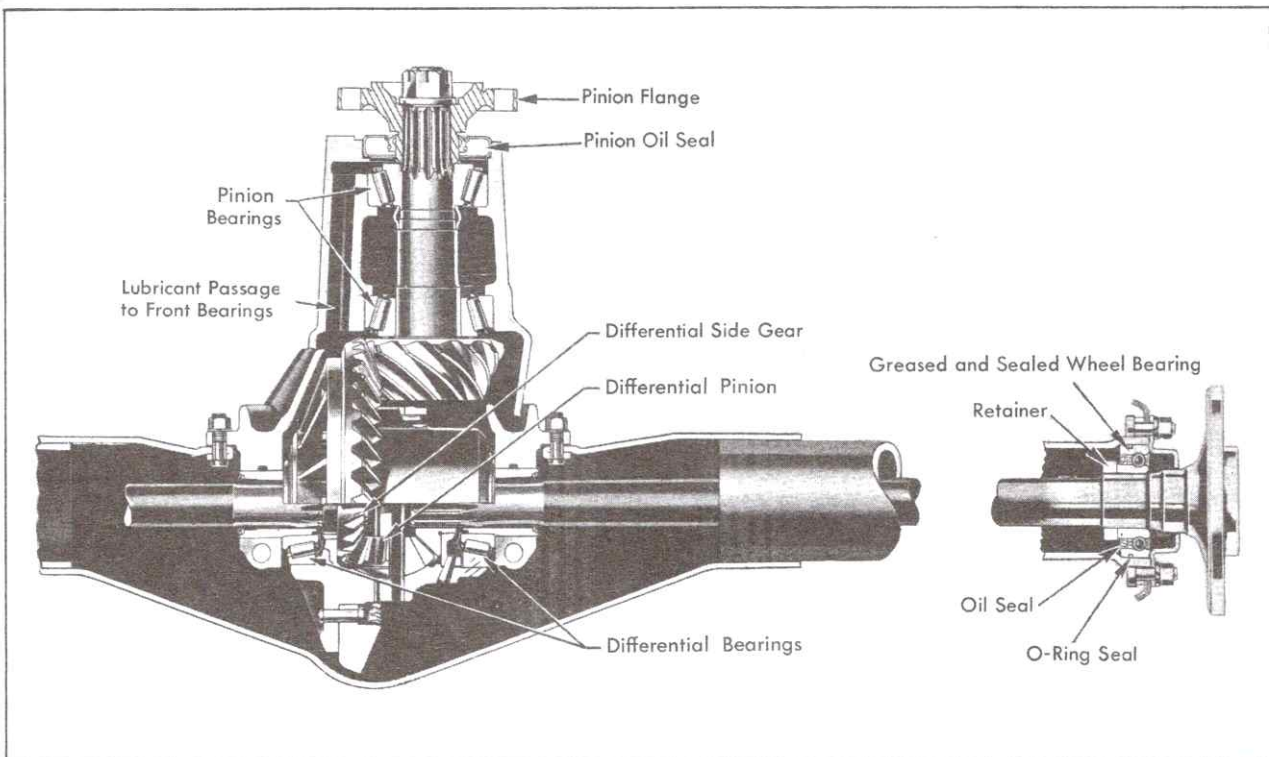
Differential Carrier and Rear Axle Assembly
